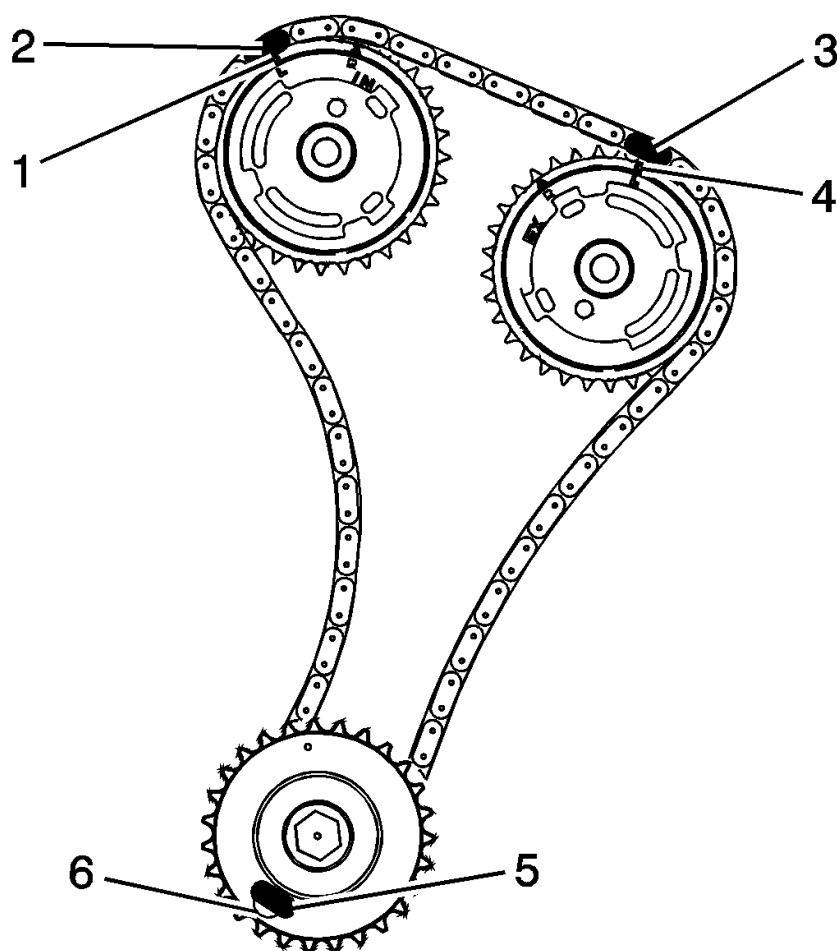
Locating Left Secondary Camshaft Drive Chain Timing Marks
